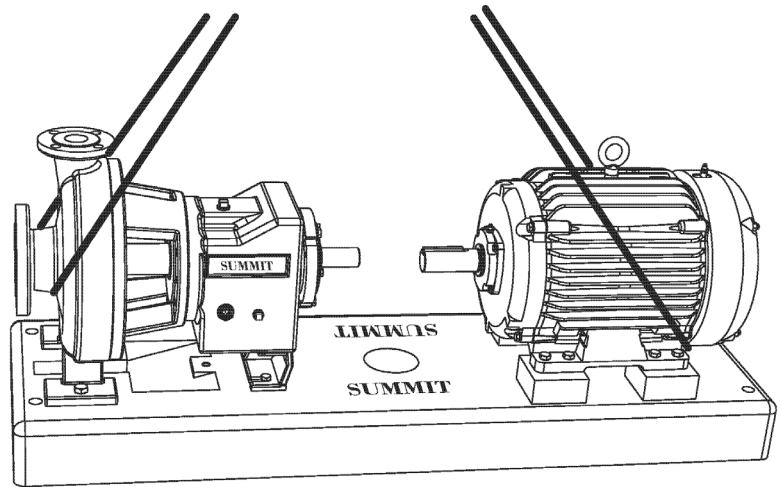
Safe lifting (Pump, Motor, Baseplate)
